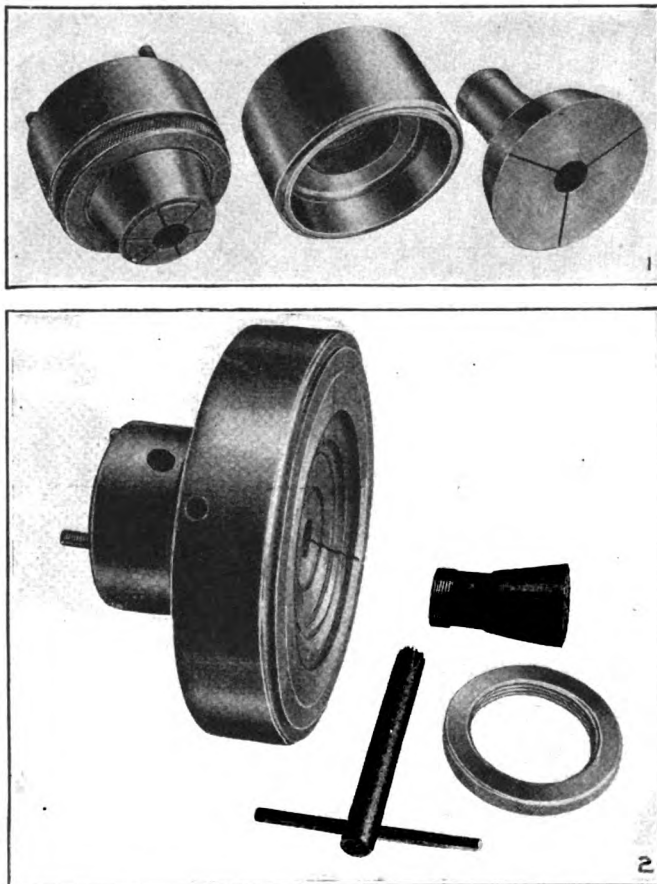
HARTFORD COLLET CHUCK ASSEMBLED, AND SMALL CLOSING RING AND STEP COLLET. FIG. 2—CHUCK ASSEMBLED WITH LARGE SIZE CLOSING RING
